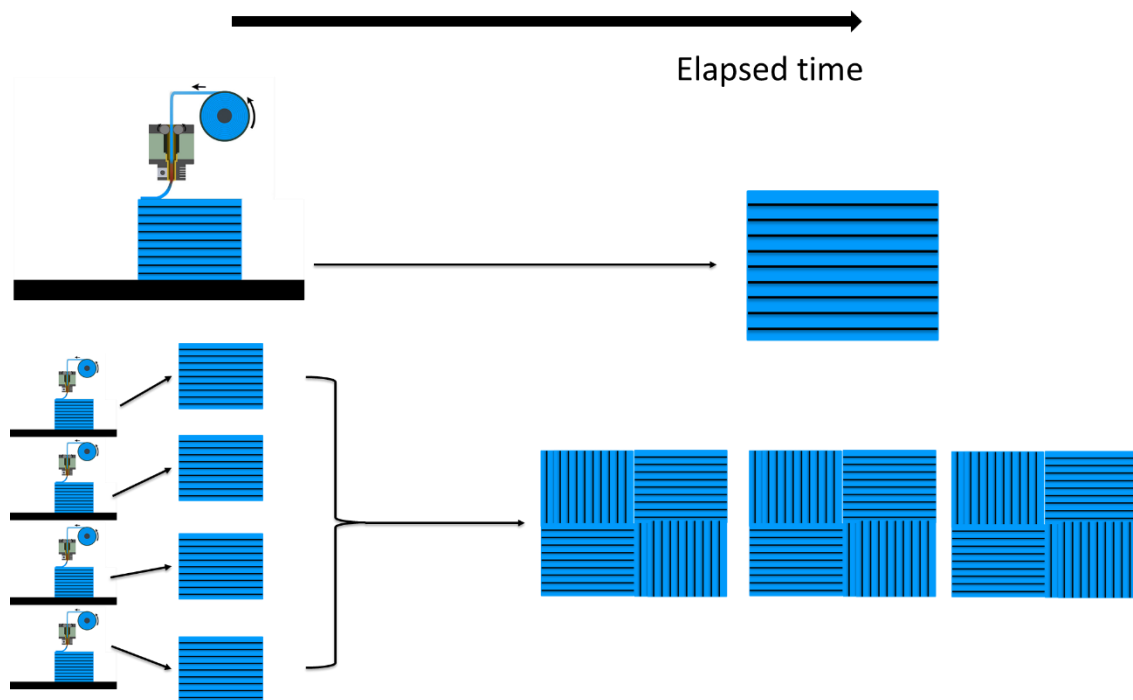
Schematic of the benefits of 3D printer farms for components production The productivity of many smaller 3D printers is generally higher than a single larger machine. Parts can be 3D printed with material stacking directions optimized with respect to service loading.
